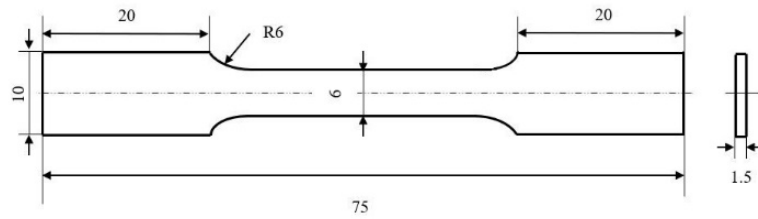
Specimen geometry of dog-bone tensile test specimen in mm.
